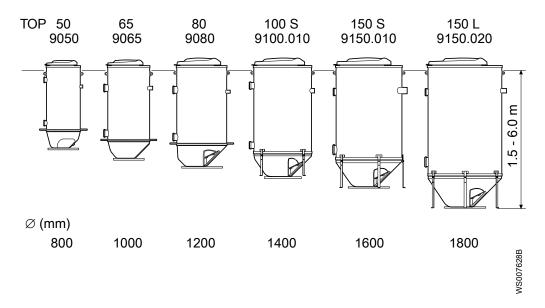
Dimensional drawing. Diameter unit: mm. Length unit: m.
